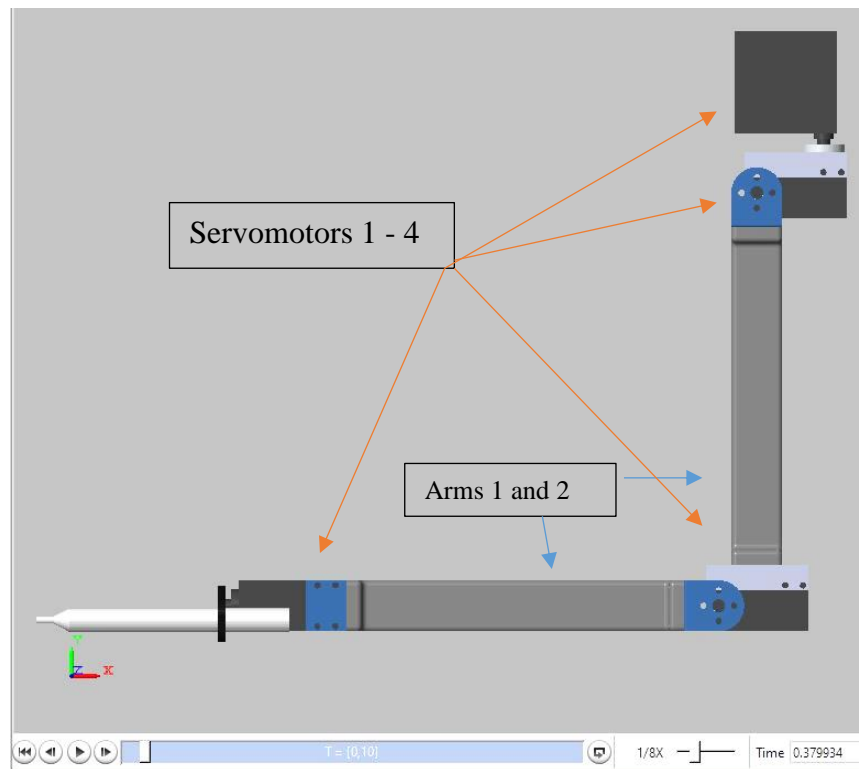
4 DOF Robotic arm assembly made with SolidWorks
